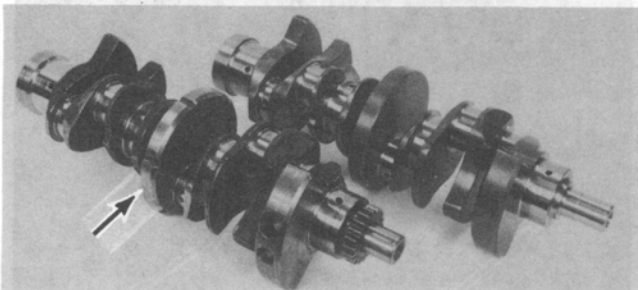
Internally balanced production V6/60 crankshaft (foreground) has integral timing disc (arrow). Competition V6/60 crankshaft (rear) is machined from steel billet.
